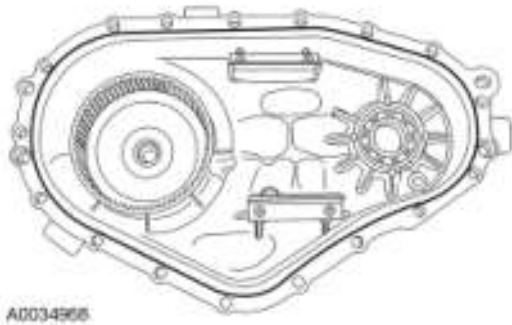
Applying Bead Of Silicone Rubber On Rear Case Mating Surface
